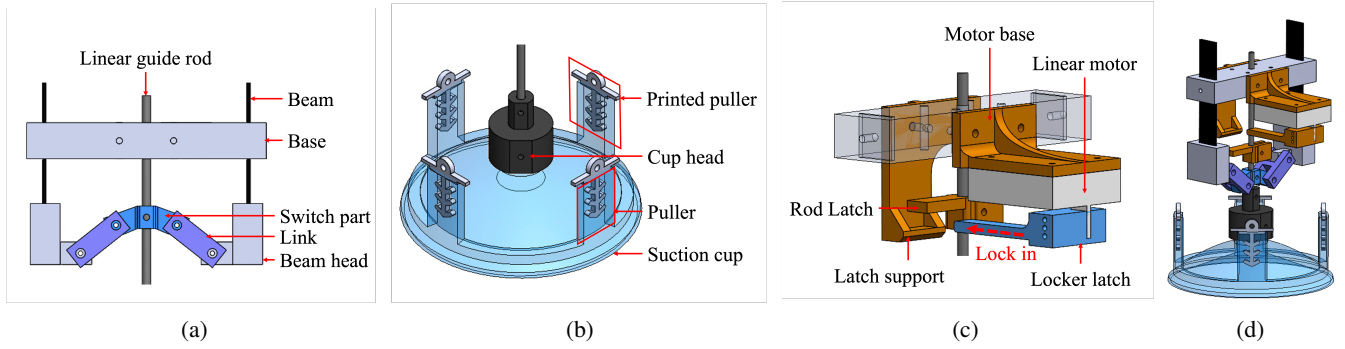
The structure diagrams of (a) the bistable mechanism, (b) the suction cup, (c) the locker, and (d) the assembly of all of them.
